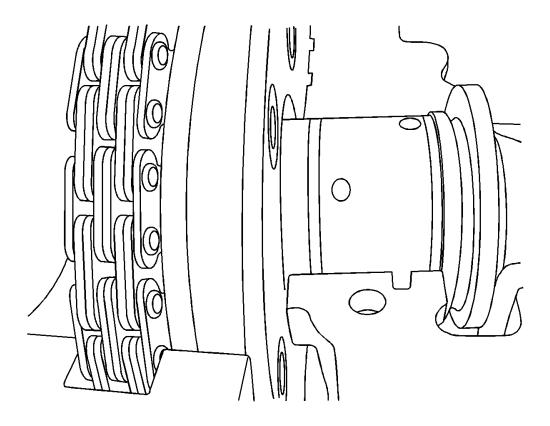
Fitting Camshaft Position Actuator Courtesy of GENERAL MOTORS COMPANY
